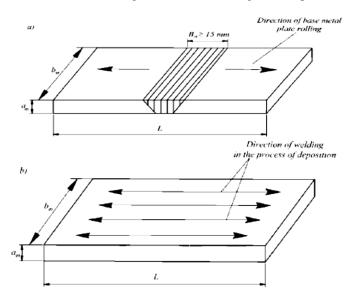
Specimens tested for resistance to intercrystalline corrosion. a – the weld metal as part of the weld;
